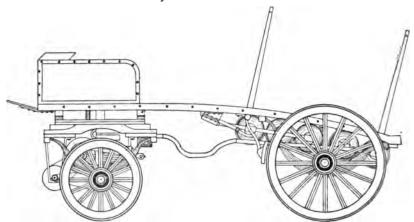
COMBINED MOTOR AUTO-TRUCK.
